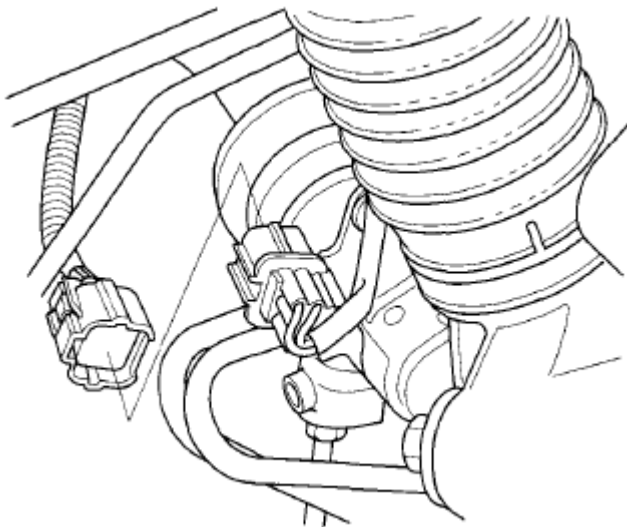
Disconnecting ECPS Valve Motor Connector From Steering Gearbox
